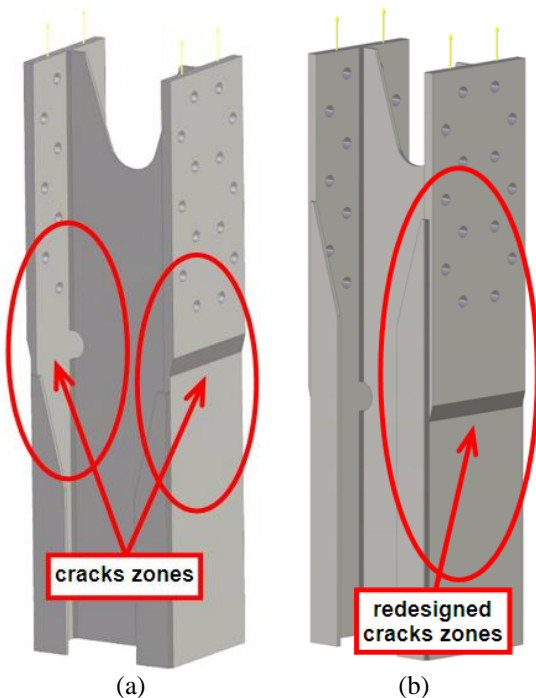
3D models of the original (a) and redesigned (b) column head
